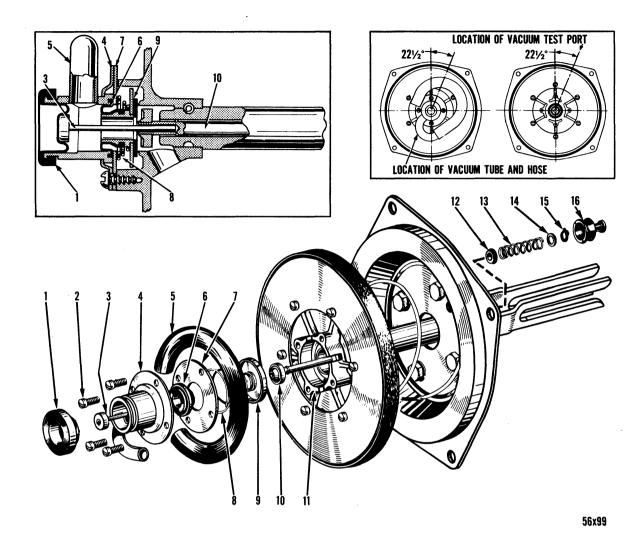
Assembly of Valve Rod, Valve Poppet Parts, Vacuum Tube and Plate
